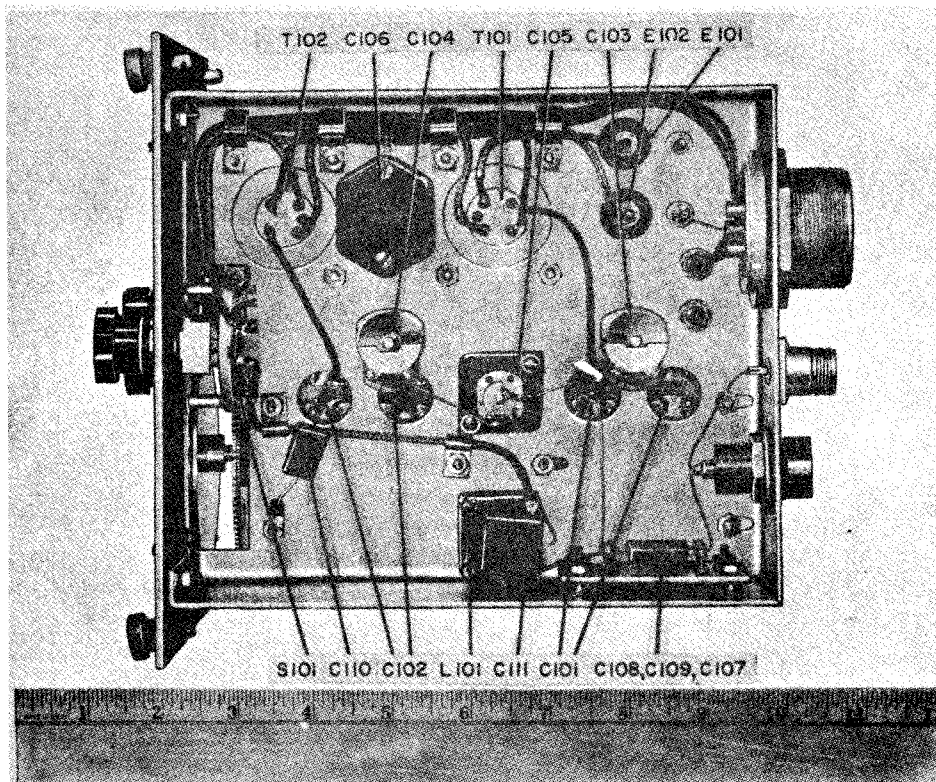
Bottom View of Antenna Coupler CU-352/BRR Showing Components Layout.
